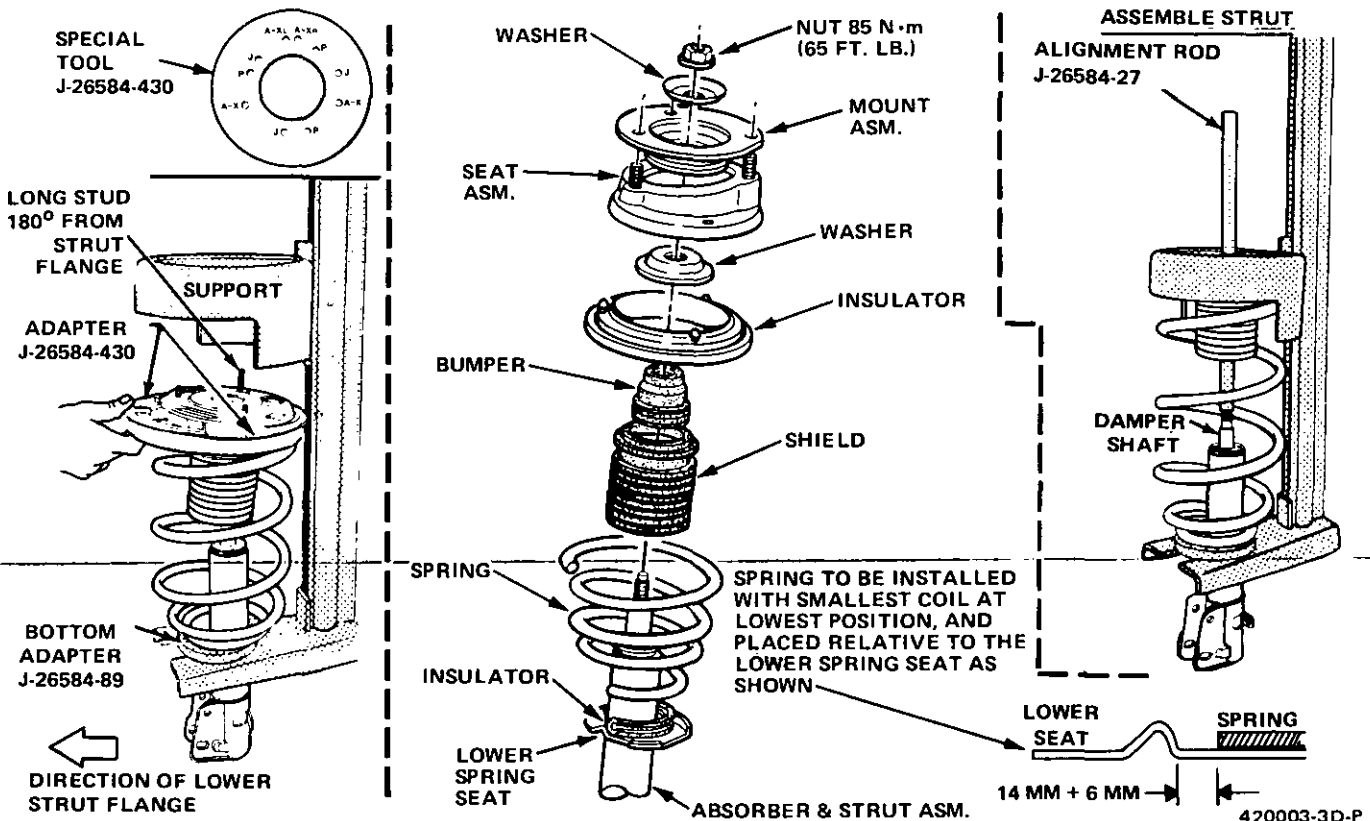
D-6 Disassemble/Reassemble Strut Assembly
